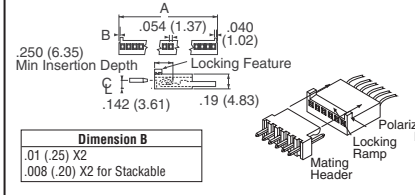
Center Crimp Terminal Housing (Contacts sold separately)
